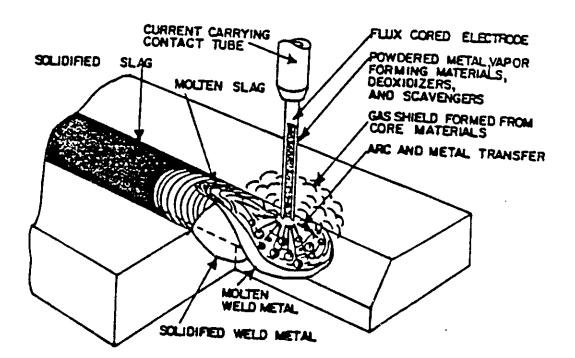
(b): SELF-SHIELDED FLUX CORED ARC WELDING
